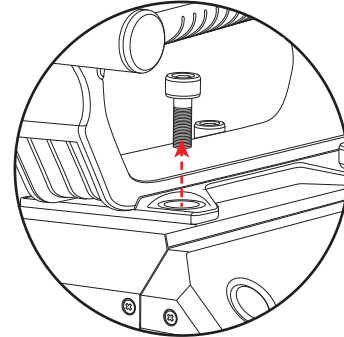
a Mounting Rosethe Sony Arm and Grip
